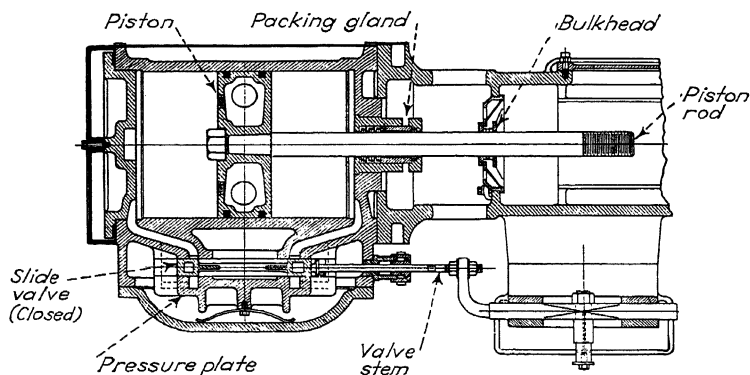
Section of a single-valve cylinder, showing valve and steam chest.
